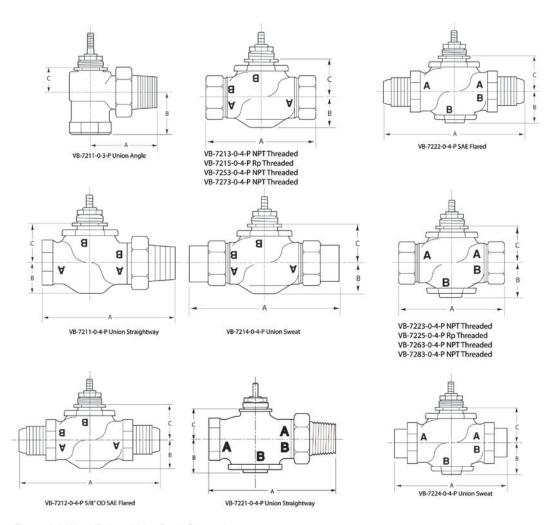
2-Way VB-7xxx Valve Body Dimensions
